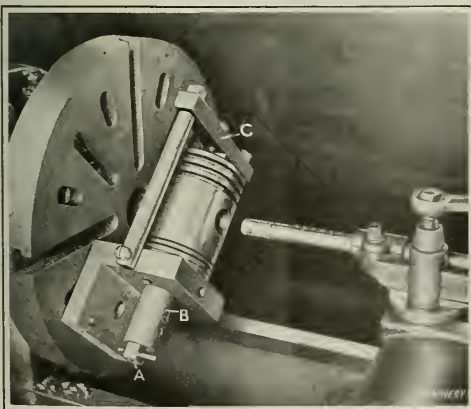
Fixture for holding Pistons while finishing Wrist-pin Hole
